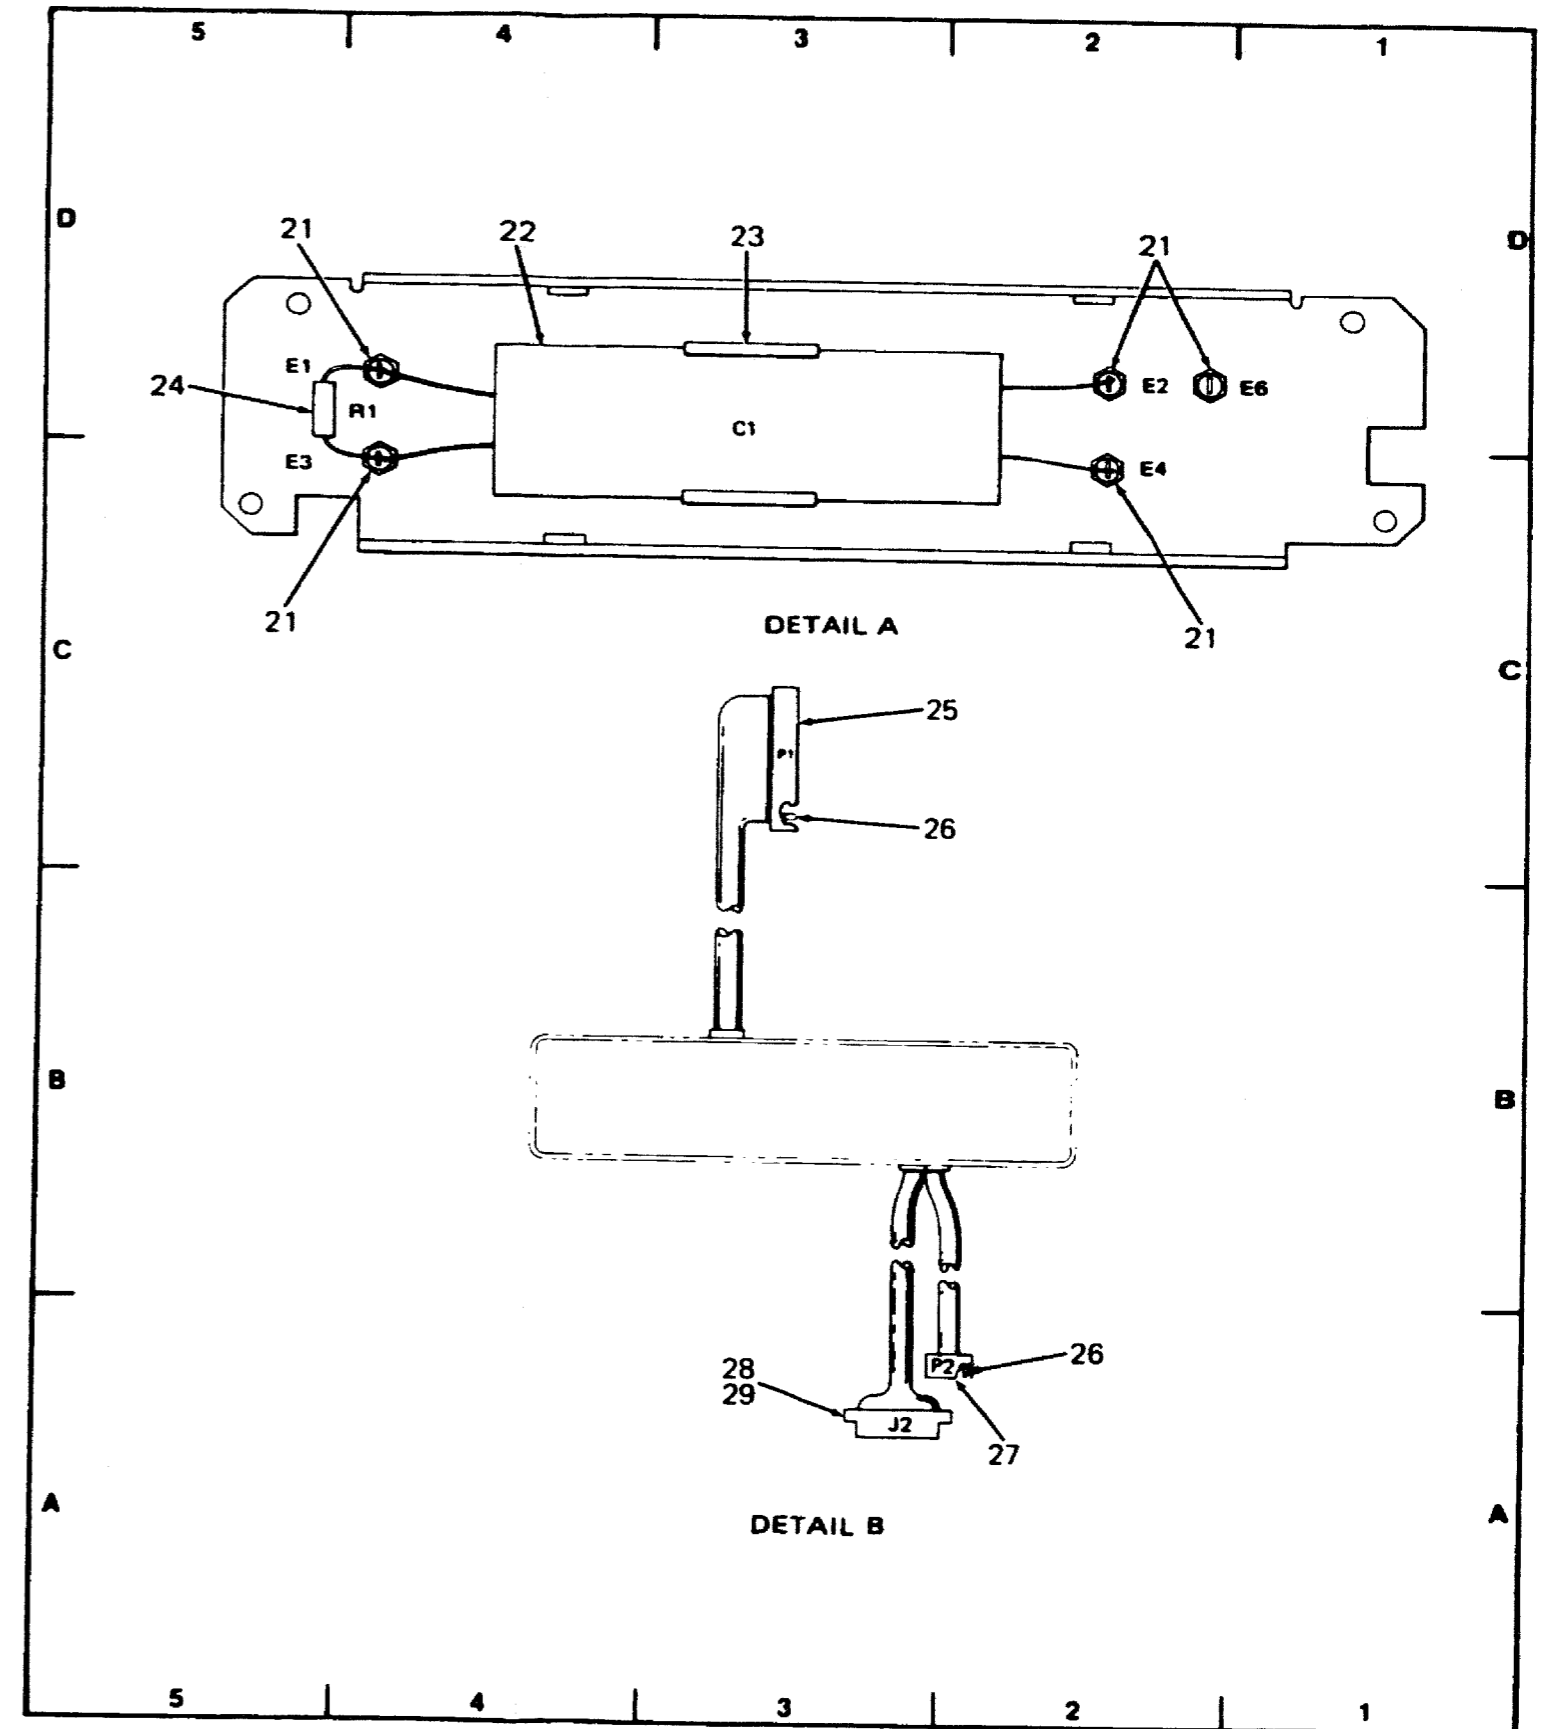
Pin Driver Module Assembly (Sheet 2 of 2)
